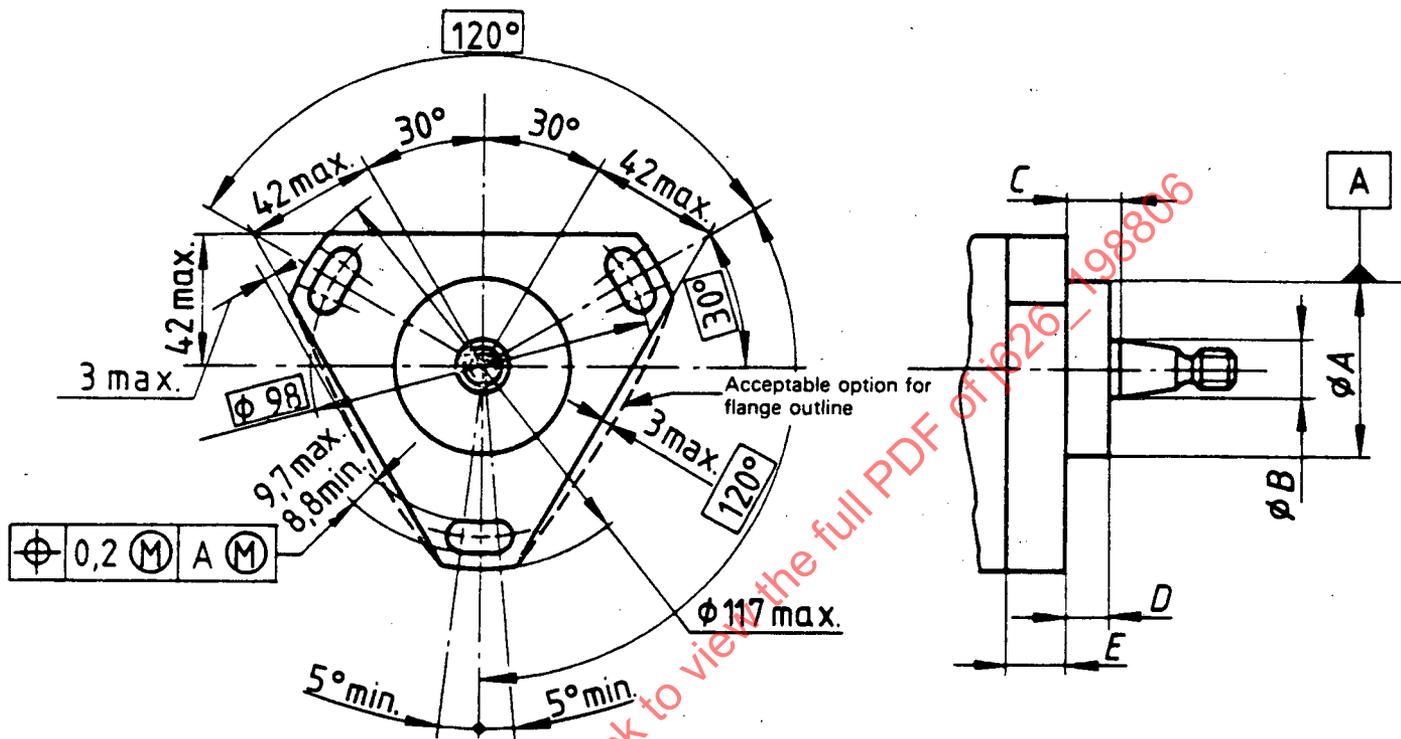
Fuel Injection Pumps - Type 2 End-Mounting Flange
